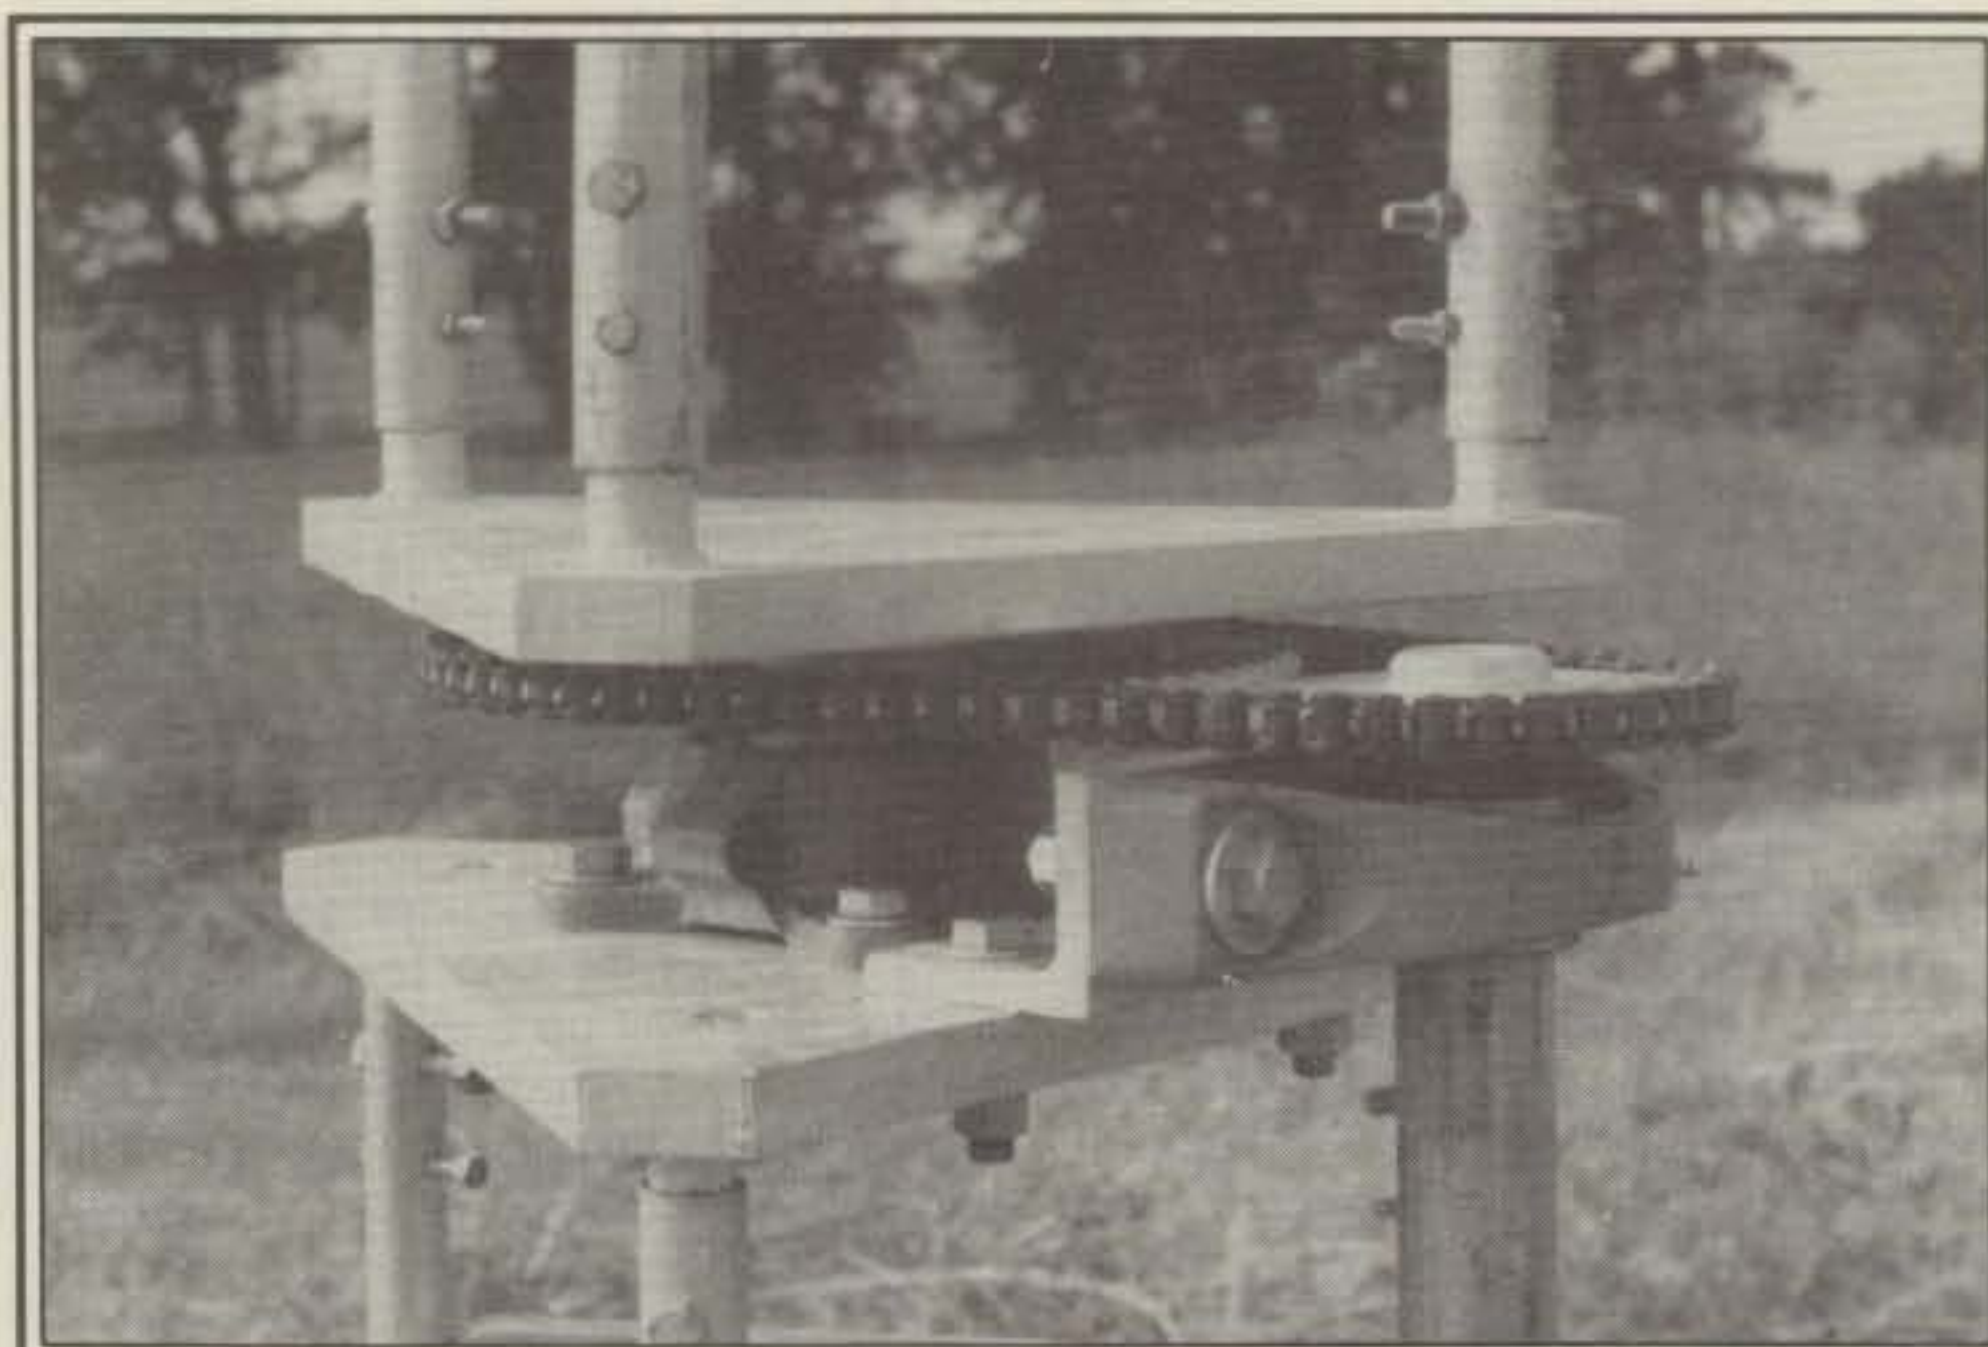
This view shows the base top plate, thrust bearing, large and small sprocket, drive rod, and bottom plate for the rotating tower.
